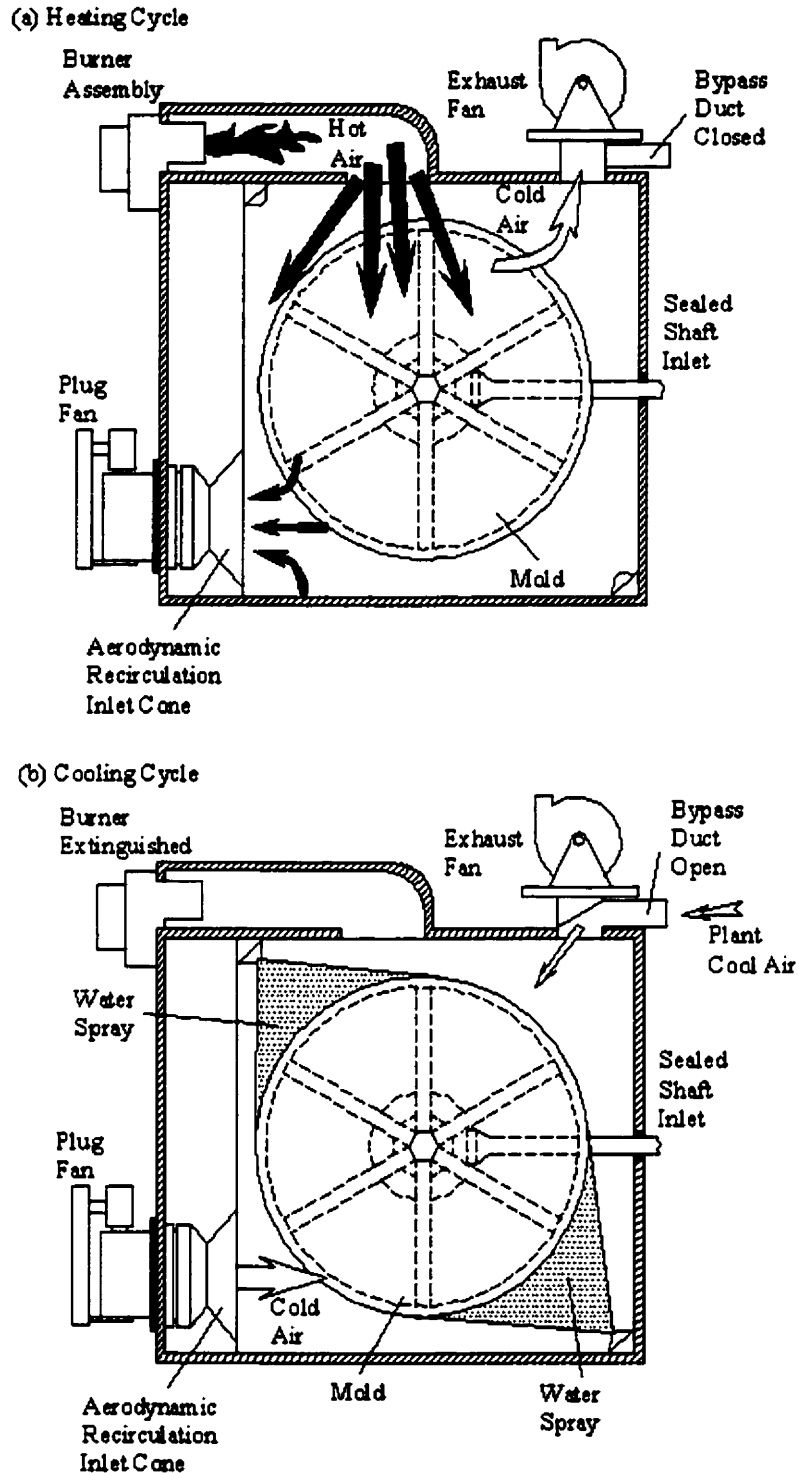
3-arm Vertical-style Rotomolding Machine Principle of Operation
